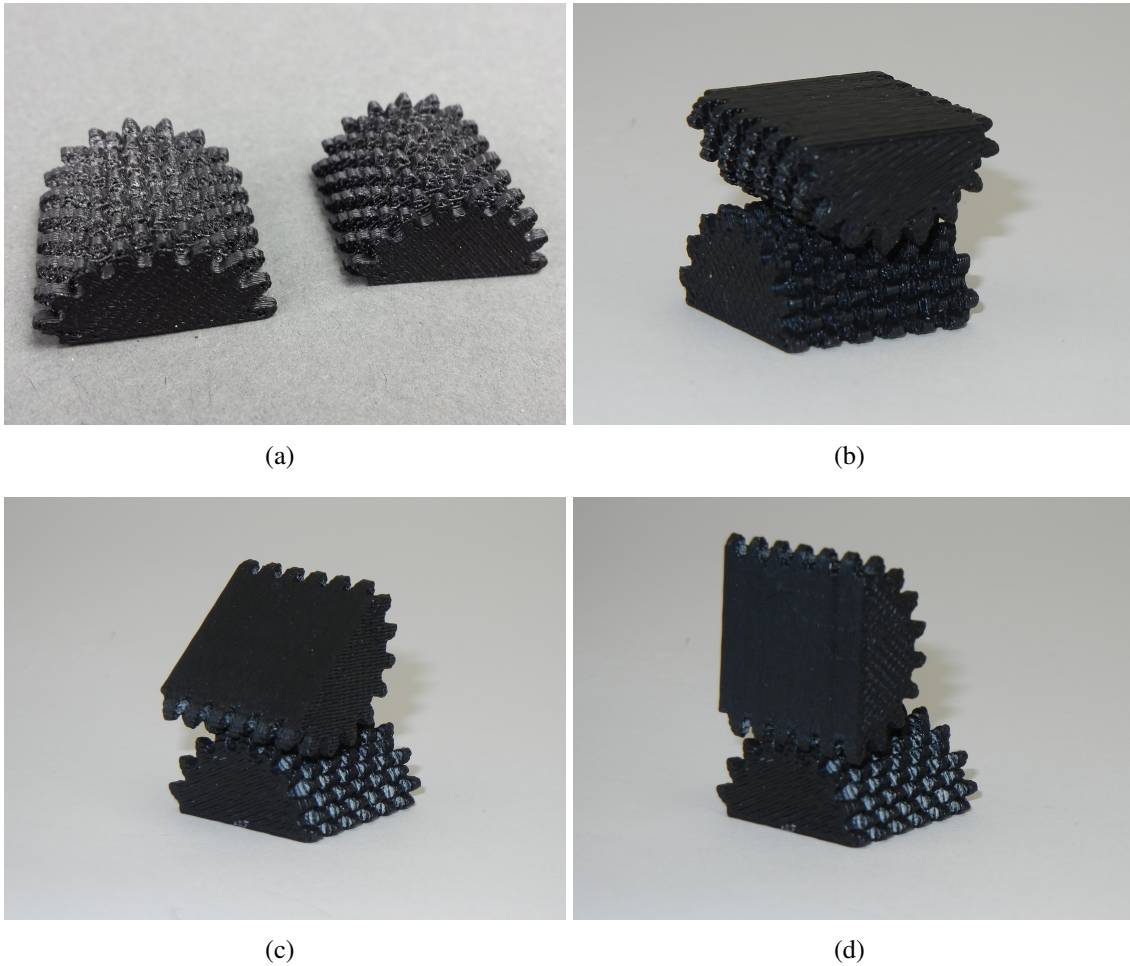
Photographs of a prototype crossed-cylinders wrist fabricated using 3D printing.
